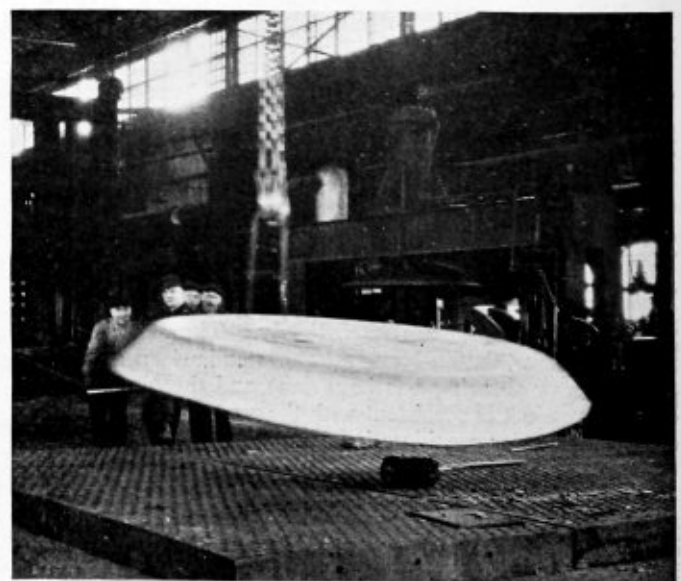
Flanged and Dished Head of 87-Inch Diameter, with $4\frac{1}{2}$ -Inch Straight Flange. Radius of Dish, 120 Inches
